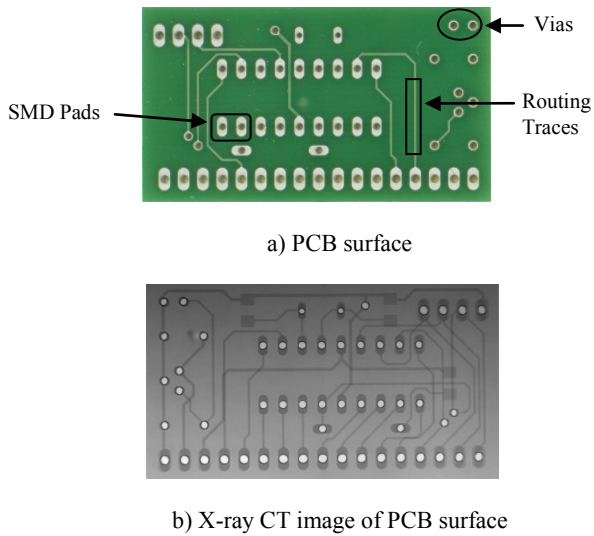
a) Image of a PCB surface (bottom side view) with interlayer connecting vias, routing and power traces, SMD pads. b) X-ray CT image of PCB surface.
